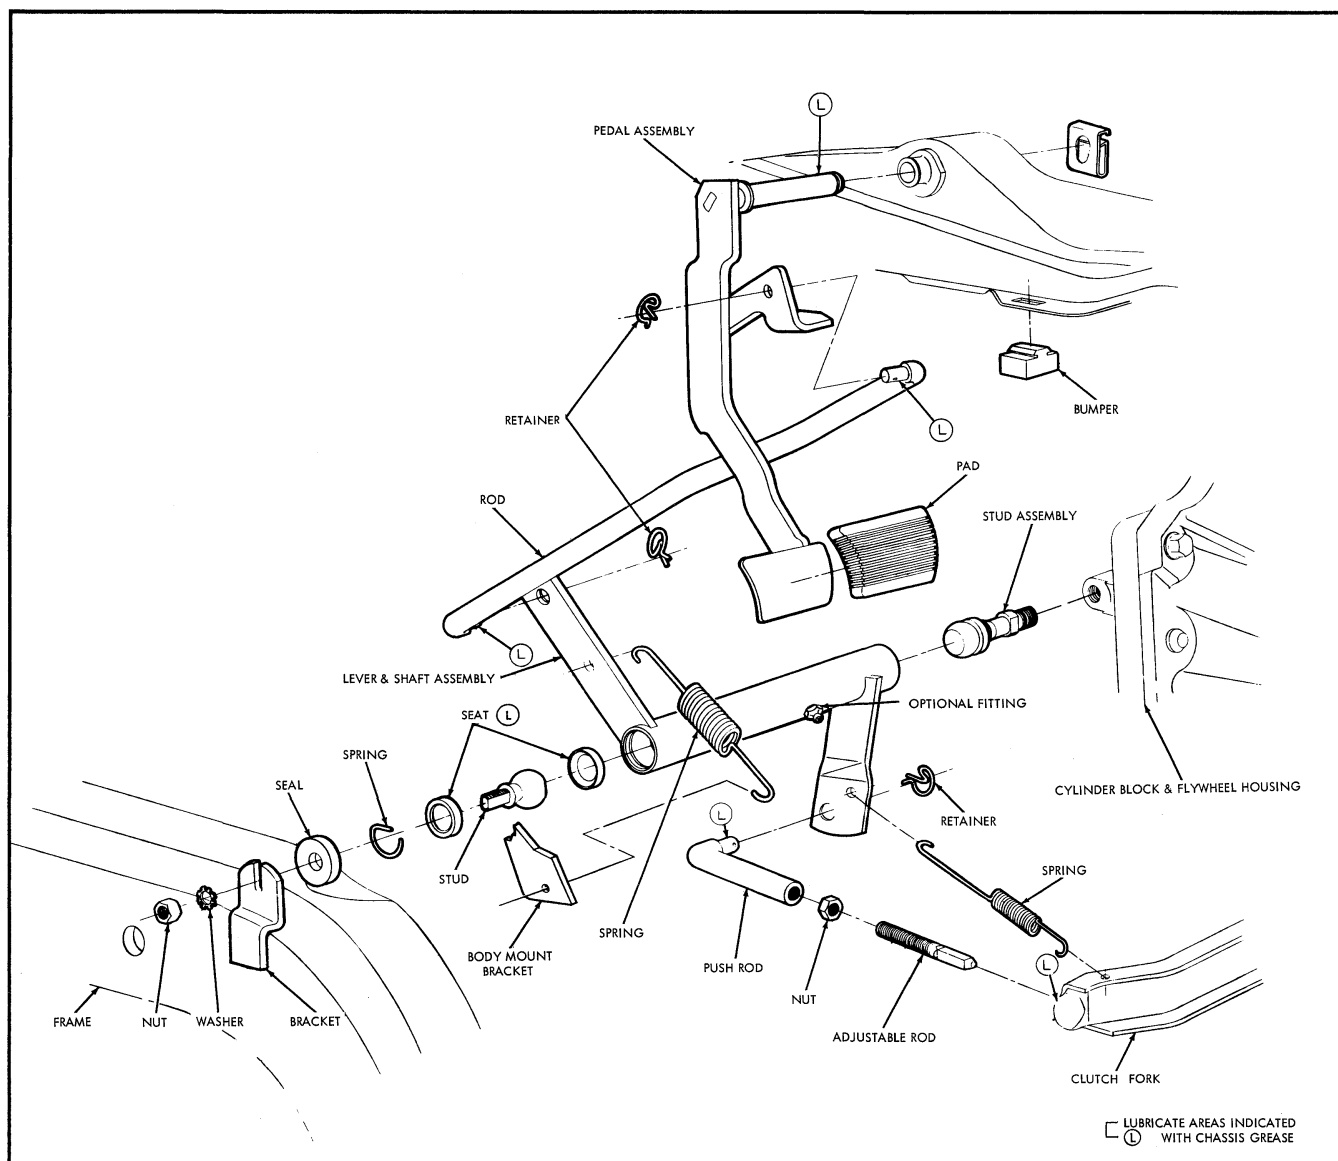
D-2 Clutch Control Linkage - 6 Cyl.
